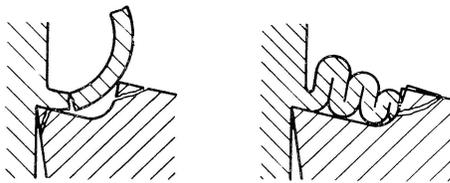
An incorrect chip breaker becomes a tool breaker.
